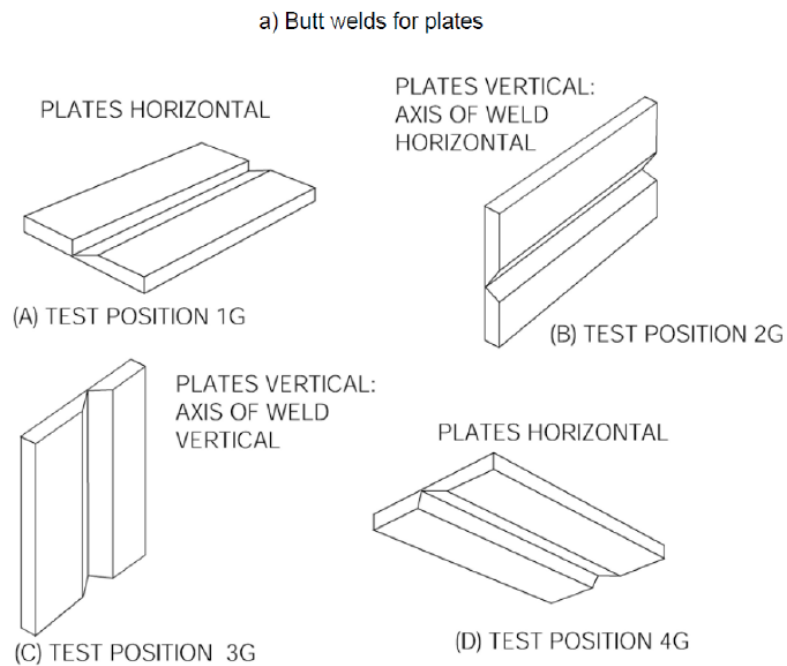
Welding positions according to AWS-Code
